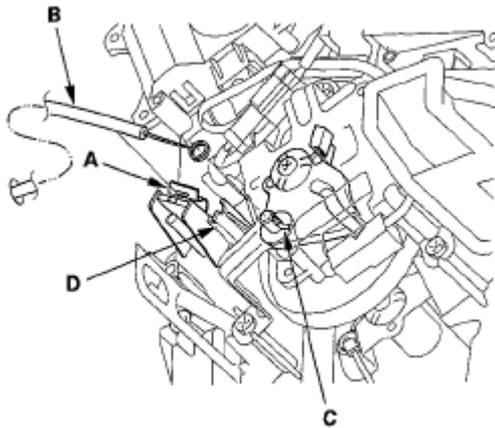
Identifying Cable Clamp, Heater Valve Cable And Air Mix Control Linkage
